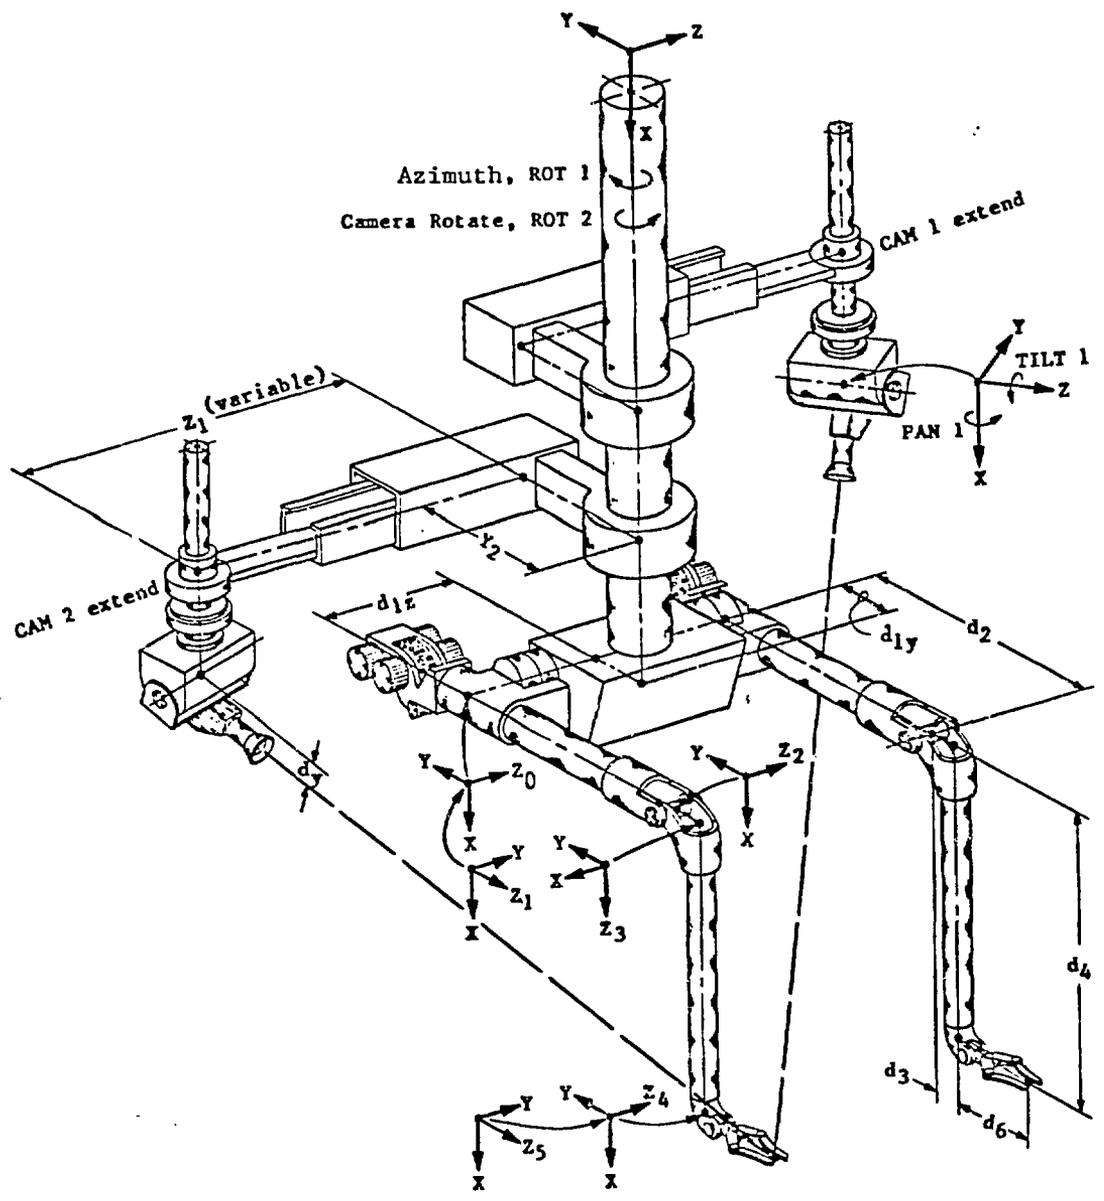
KINEMATICS OF SM-229 WITH BOOM MOUNTED CAMERAS.
